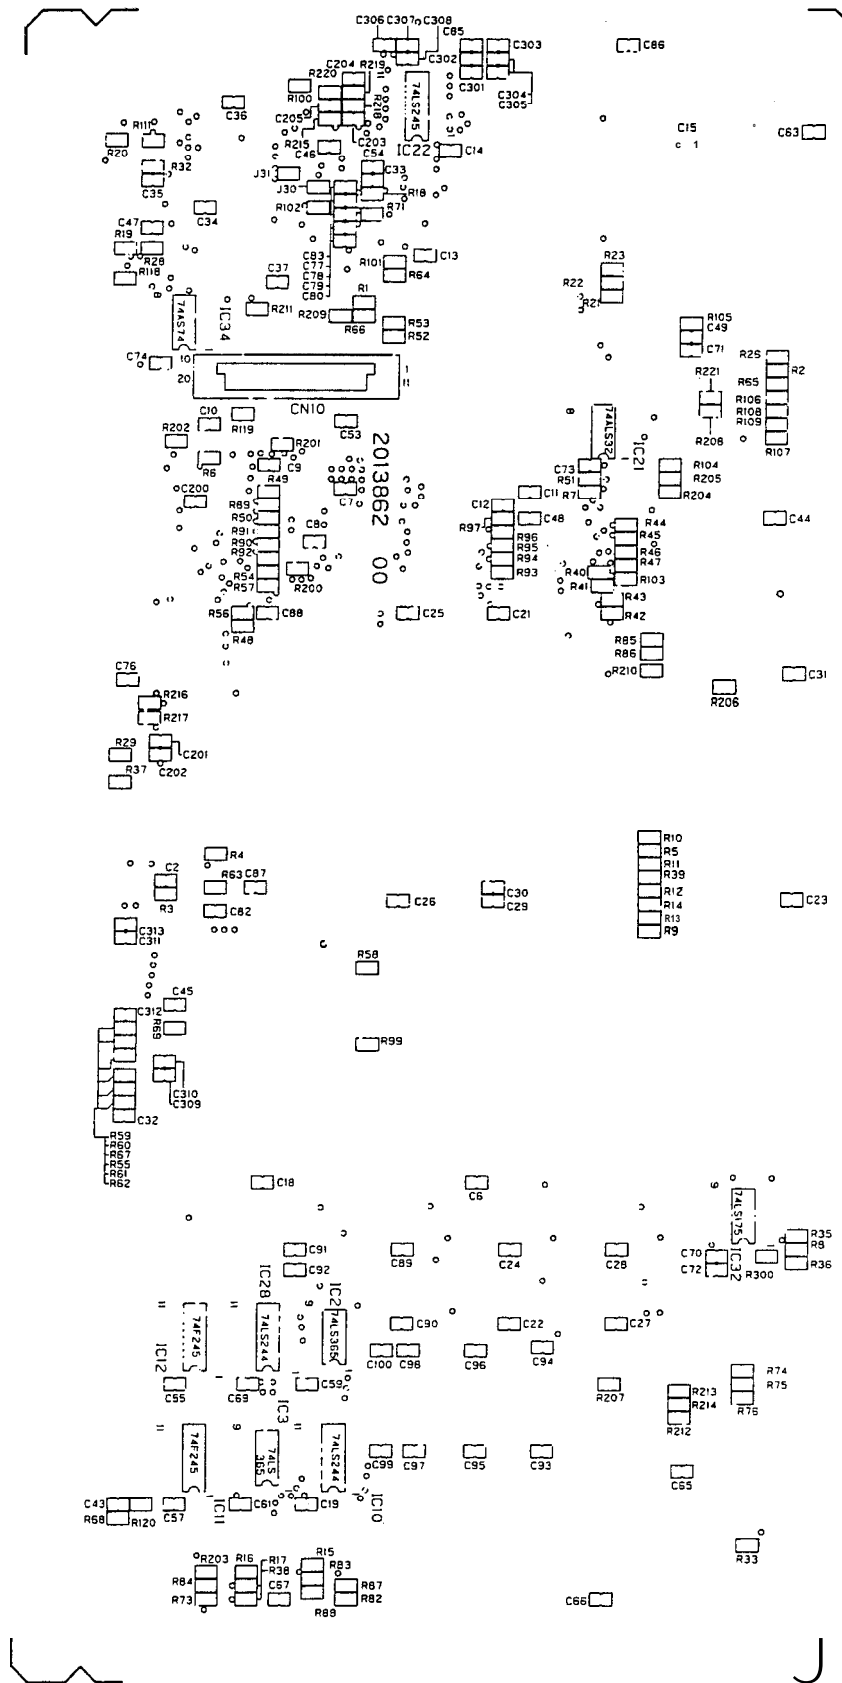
C135 MAIN Board Component Layout (Rear Side)
